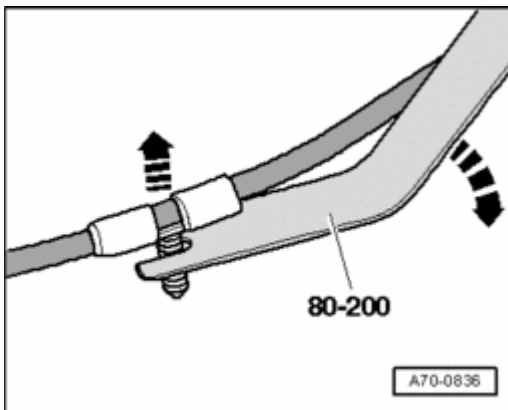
Using Pry Lever 80 - 200 To Remove Instrument Panel Central Tube
